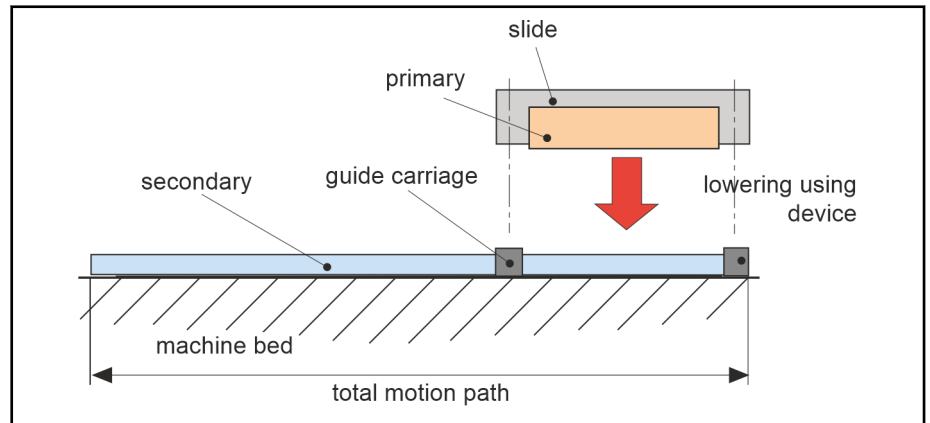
Installation of linear motor components at a path consisting of one single secondary part.
